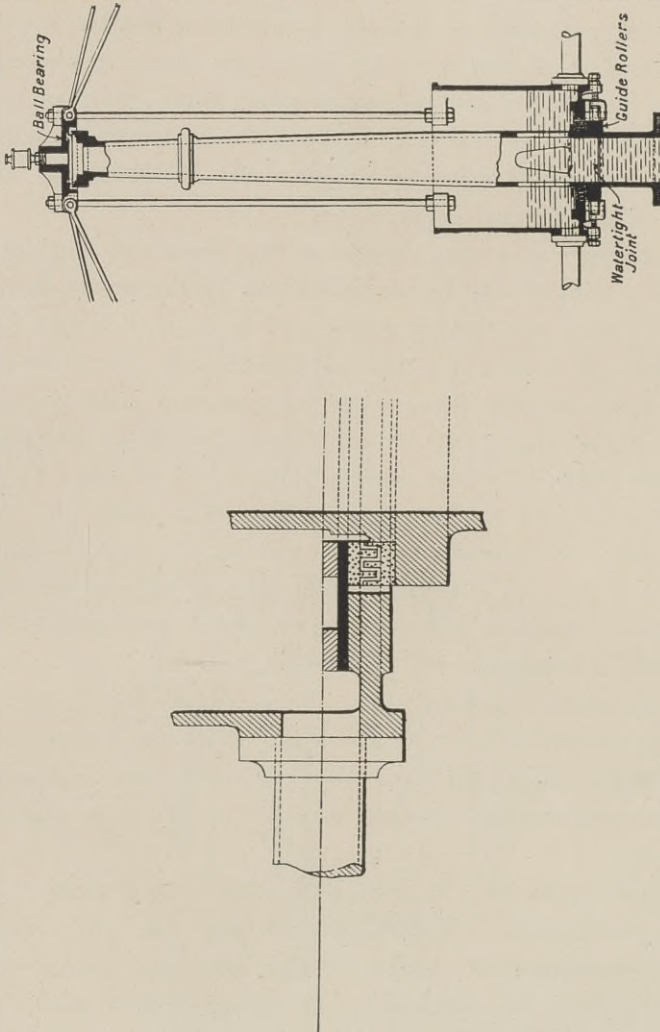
Section through Centre Pillar of Circular Distributor, Showing Construction of Joint with Supply Pipe. Enlarged Section of Centre Joint.
